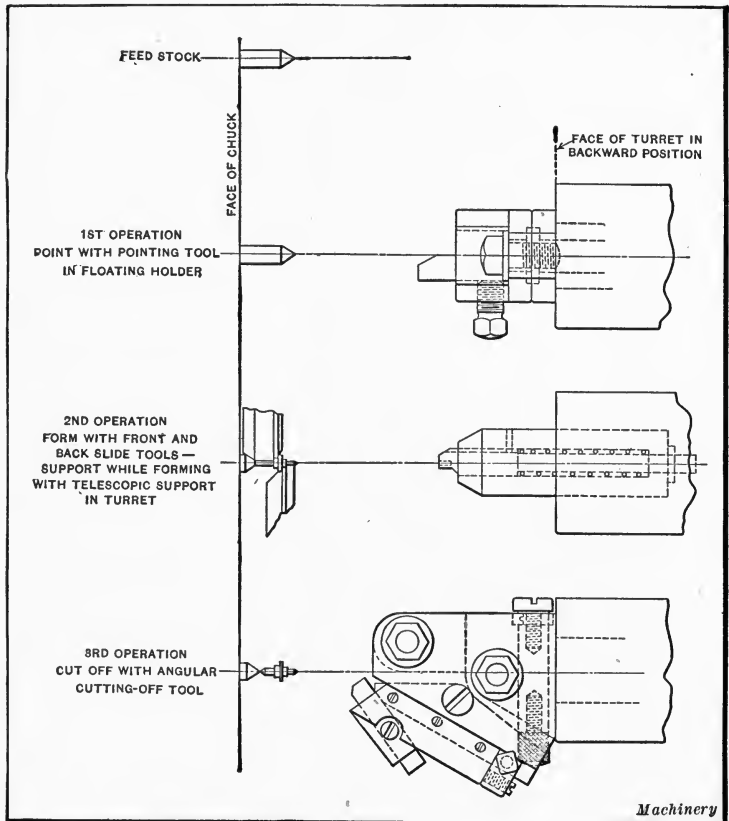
Tools used and Order of Operations followed in Making the Pinion Blank shown in Fig. 10
